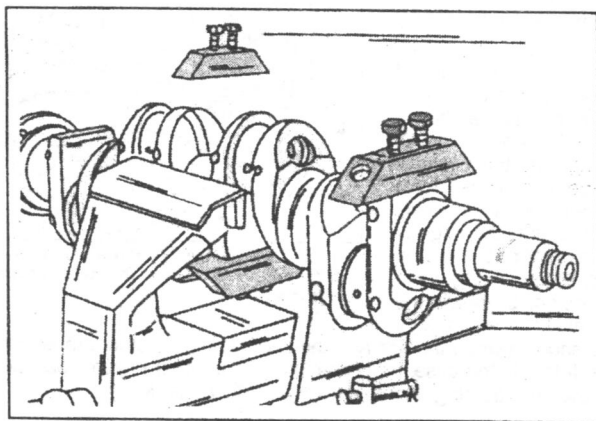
The crankshaft counter weights are secured to the crankshaft as shown. Mark each counter weight for installation position before removal.
